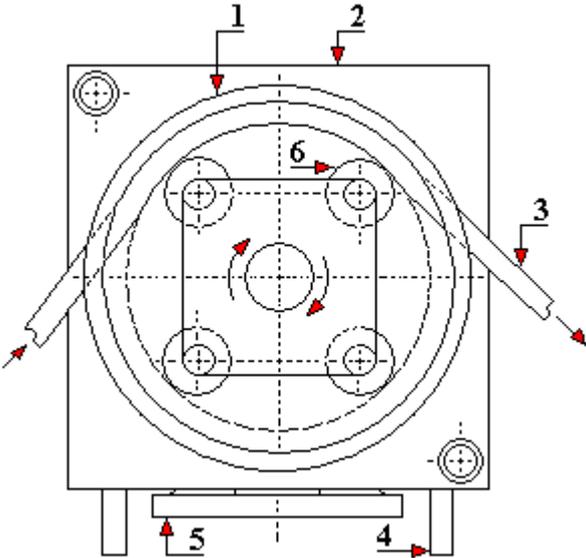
Design No. 3 of a hose pump with adjustable compressing roller distances
